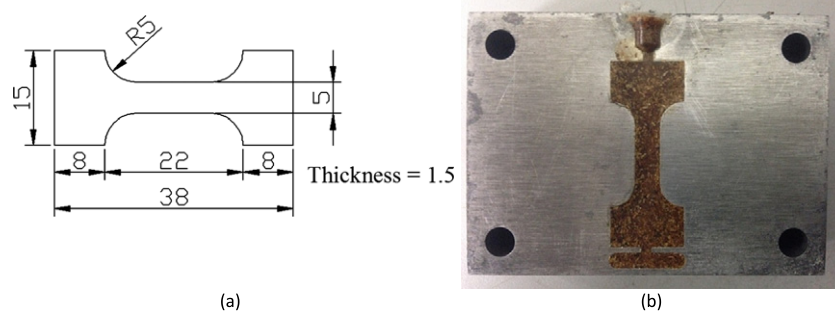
(a) Dimensions of the microtensile specimen in millimeter and (b) the mold.
